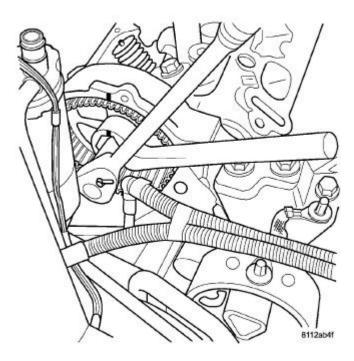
RIGHT CAMSHAFT SPROCKET Courtesy of CHRYSLER LLC
